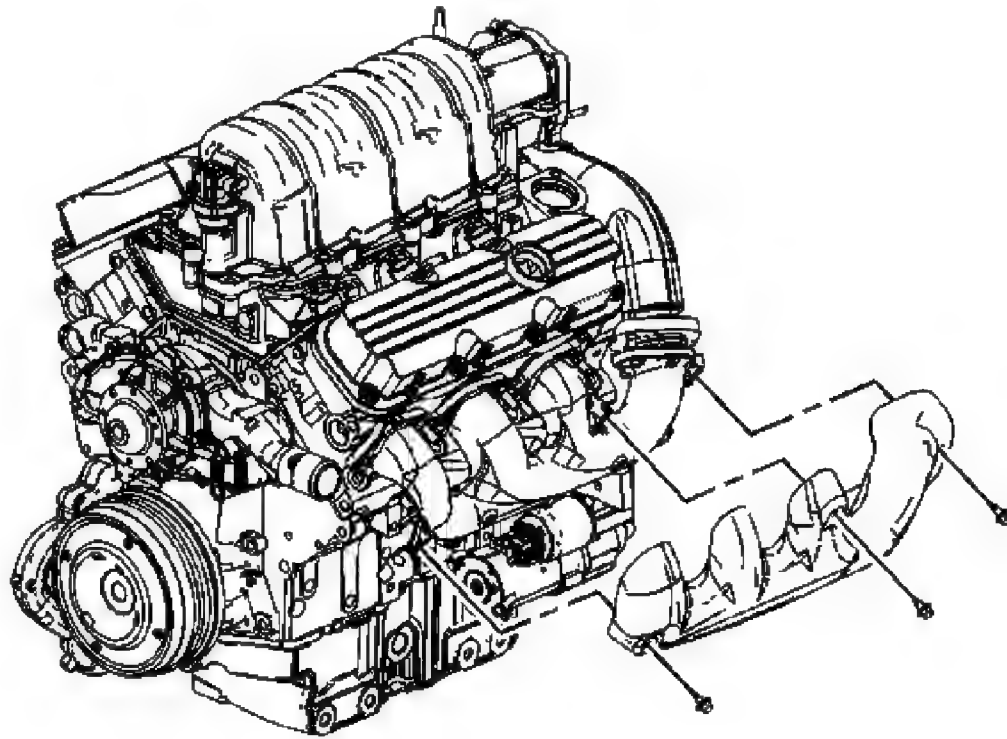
Removing/Installing Left Exhaust Manifold Heat Shield & Bolts
